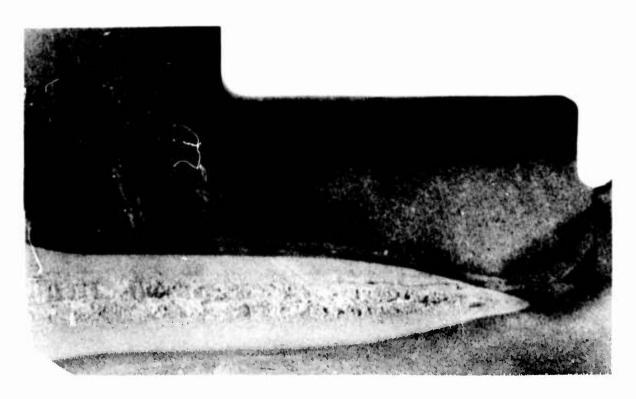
Electron Beam Weld - First-Row Pinion.
